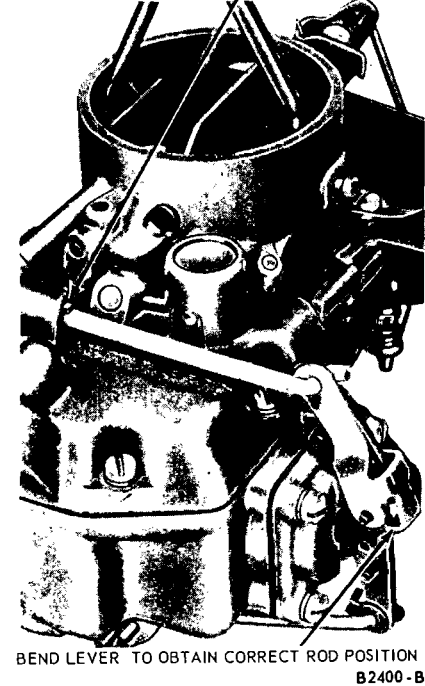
Fuel Bowl Vent Valve Adjustment—Autolite Model 1100
